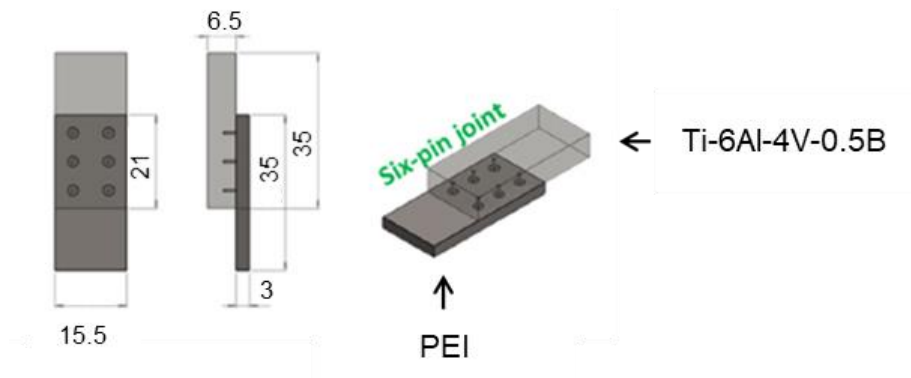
Configuration and dimensions (in mm) of the U-Joining parts (adapted from [41]).
